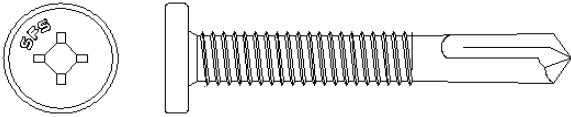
CLIP IMPAX® PANCAKE HEAD
